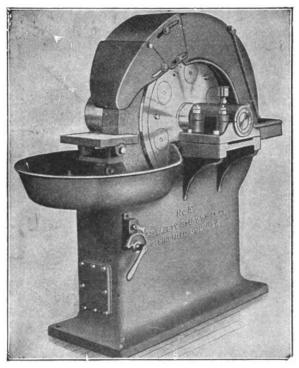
Safety Emery Wheel Co.'s wet tool grinder.
